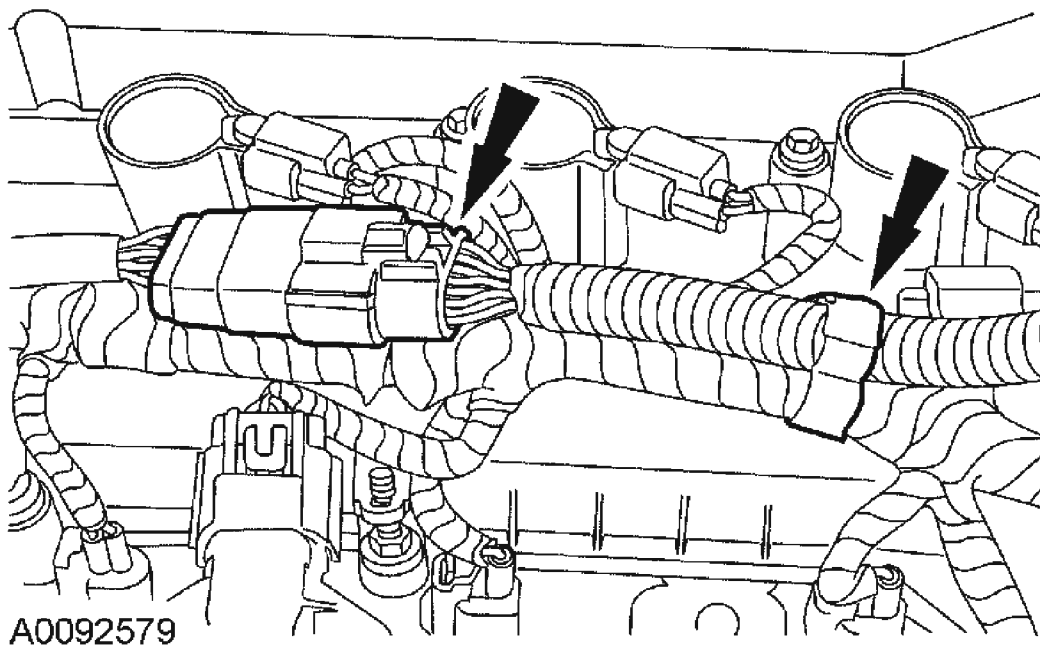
Disconnecting Fuel Charging Wiring Harness Electrical Connector And Harness Retainer
